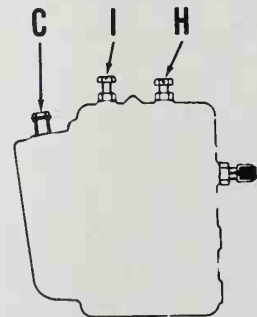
Drawing showing location of low idle speed screw (I), high idle speed screw (H) and torque control screw (C) on all models except 834 and L54.
